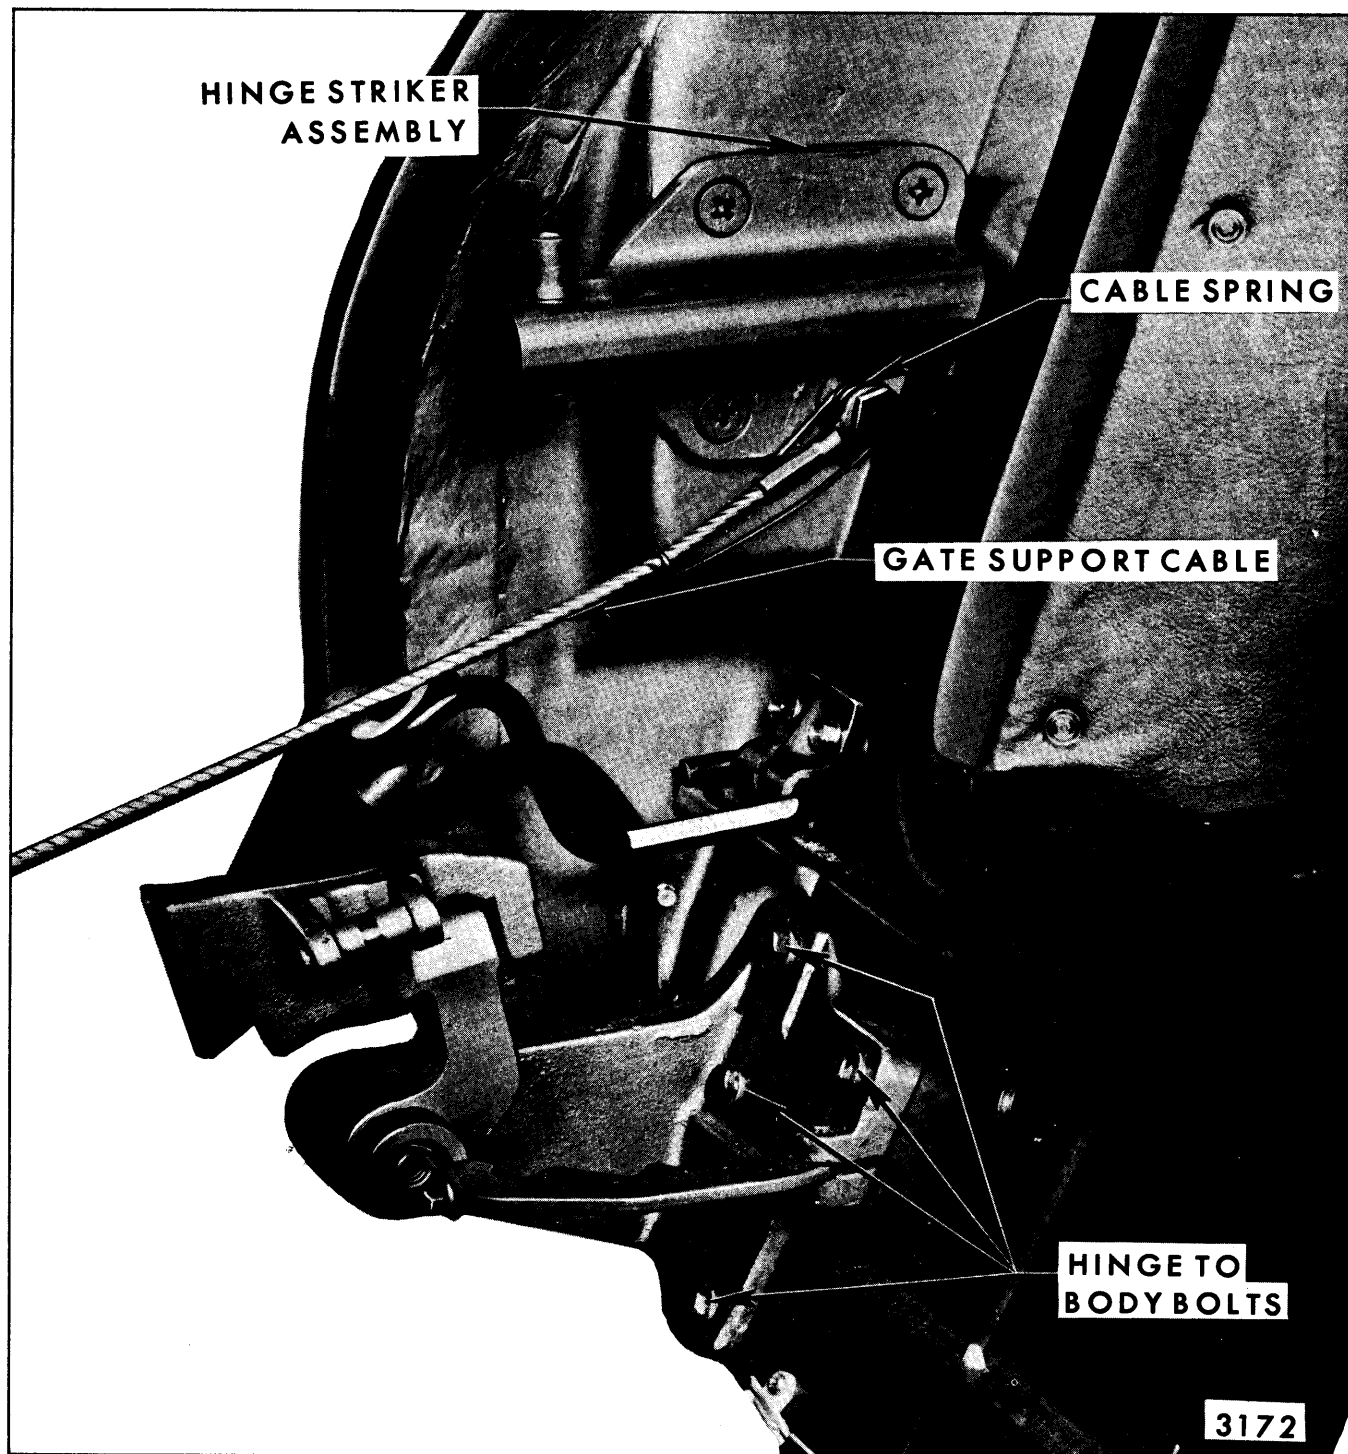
Tail Gate Adjustments - "B" Body Shown - "A" Body Typical
